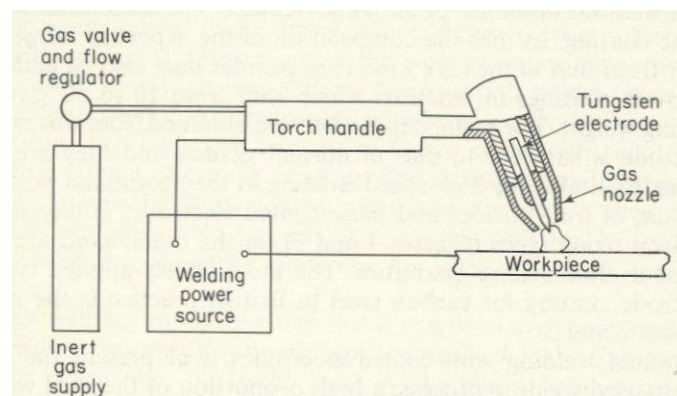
Schematic Gas Tungsten Arc Welding equipment [4]
